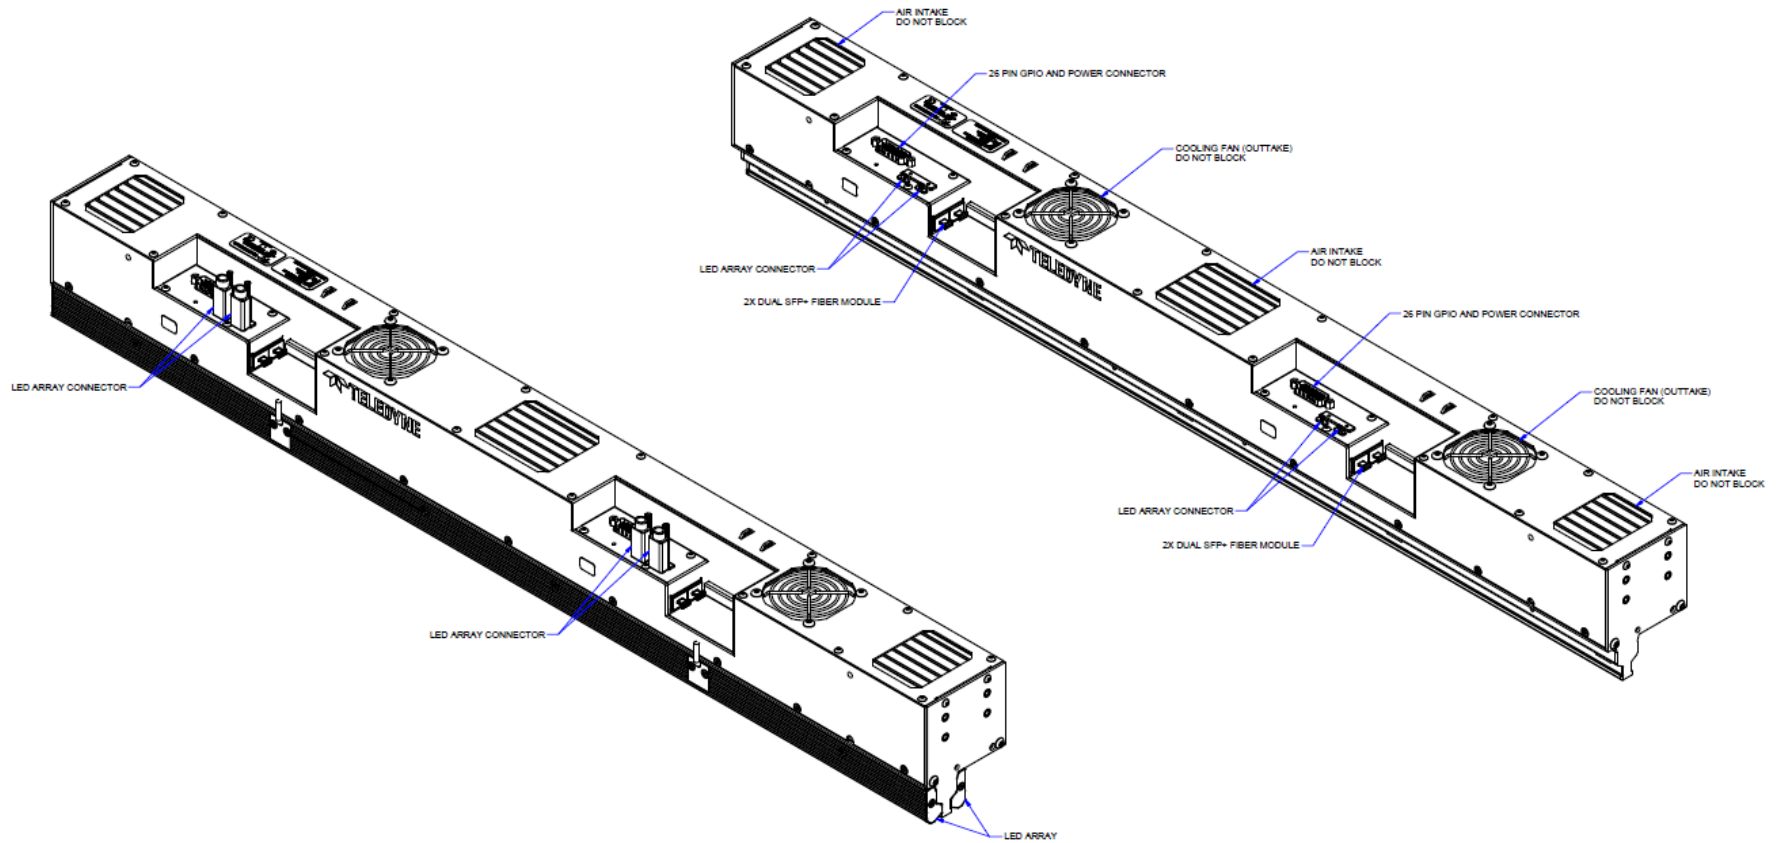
AX-FM-08A/B12H-00 800mm CIS Mechanical Drawing General Overview
